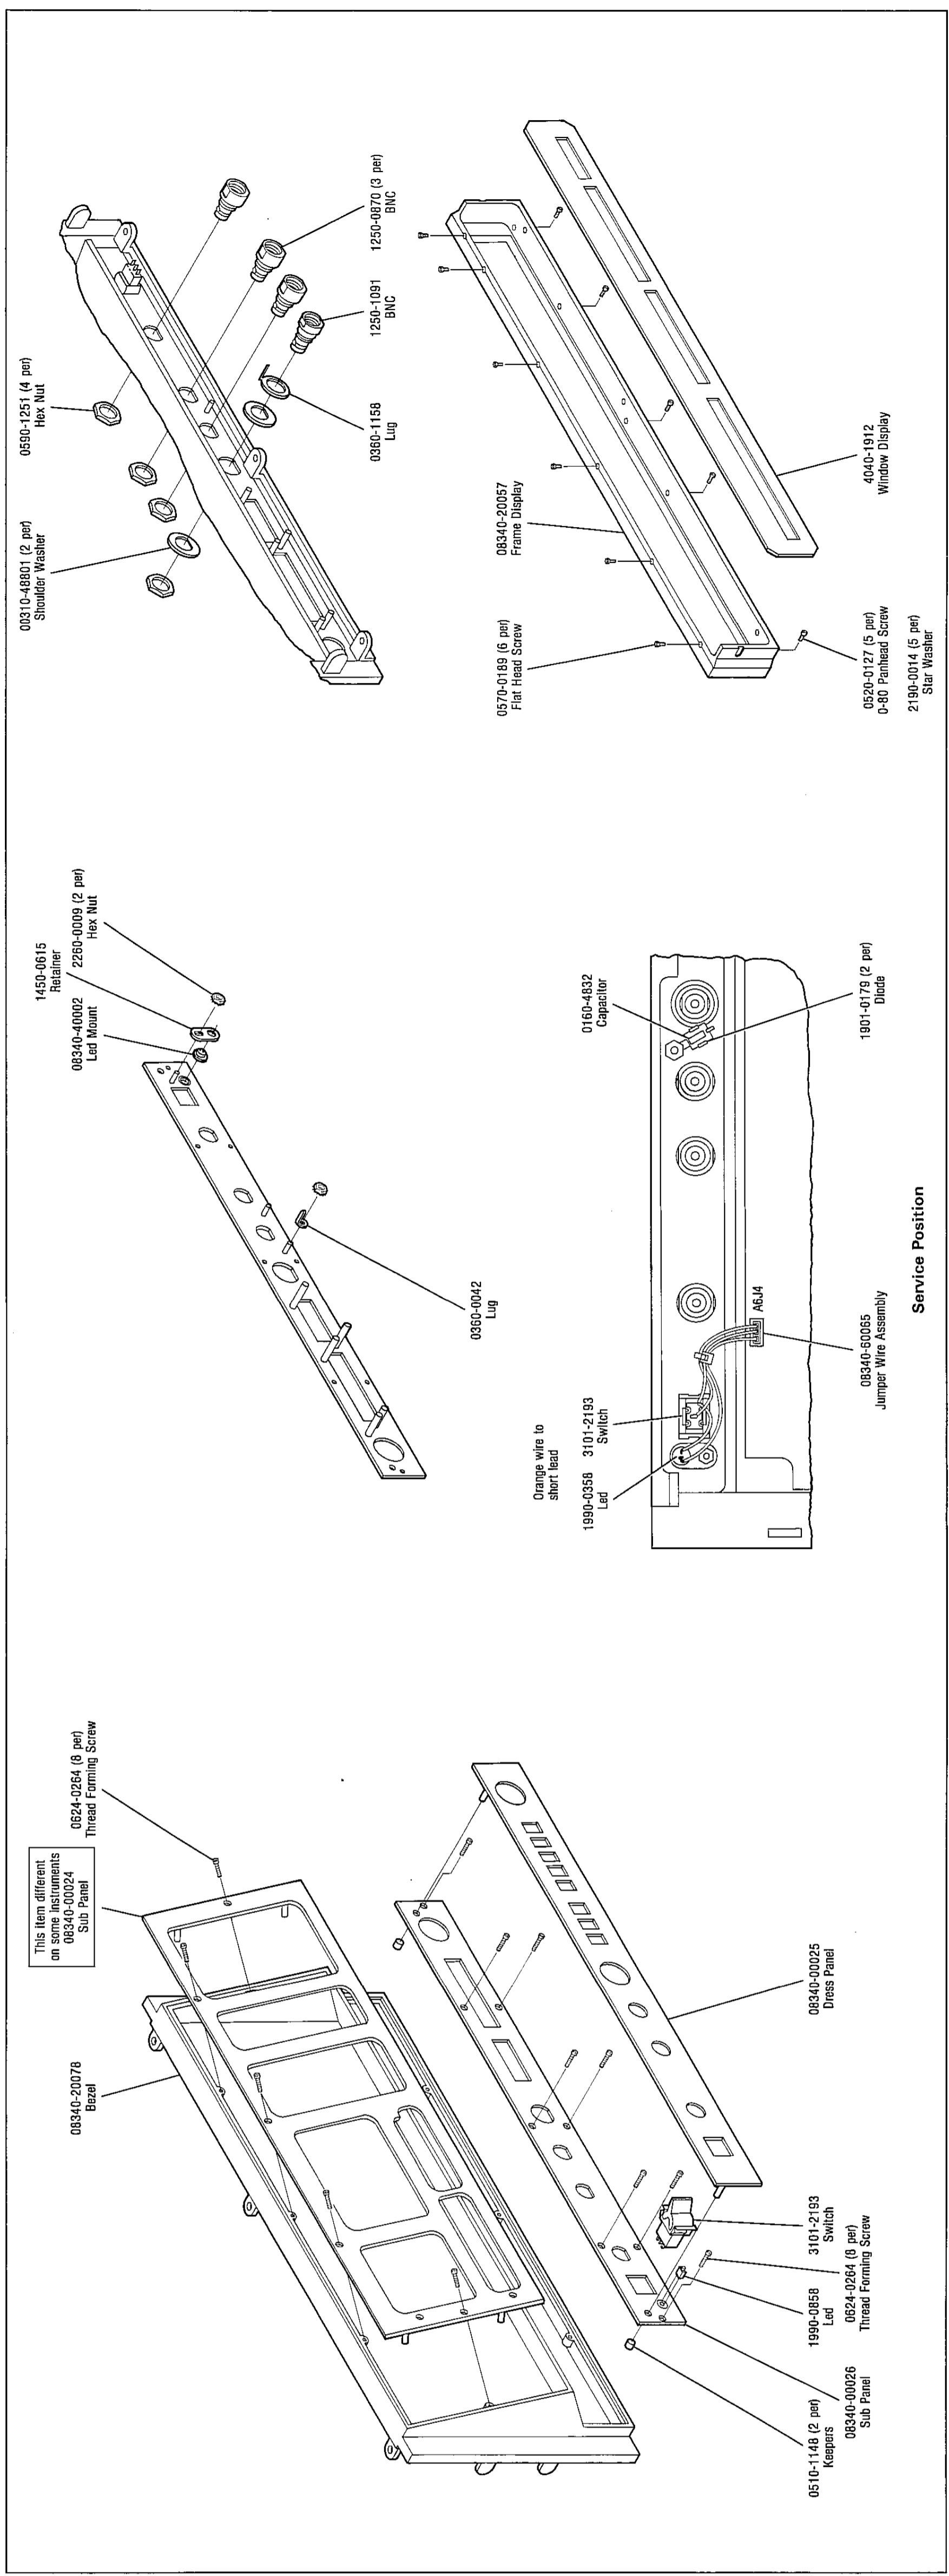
H-9. Panels, Switch, and Connectors Disassembly
